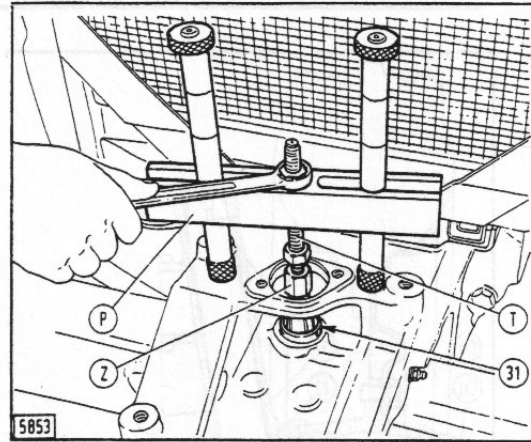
Removing bushing (31) from front axle bracket. (P) Bridge. (T) Puller rod. (Z) Coller.
